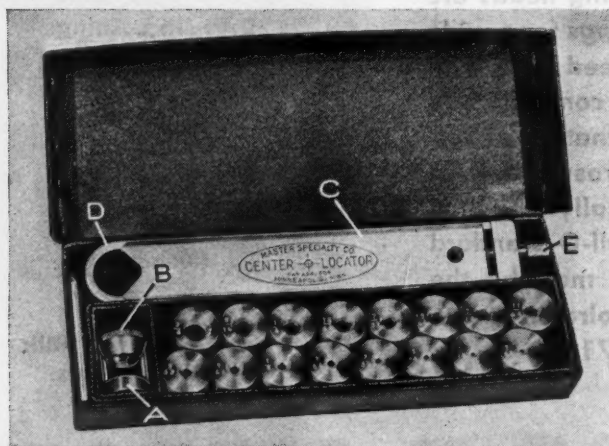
Master Optical Center-locator Set for Use in Drilling Accurately Laid-out Holes
